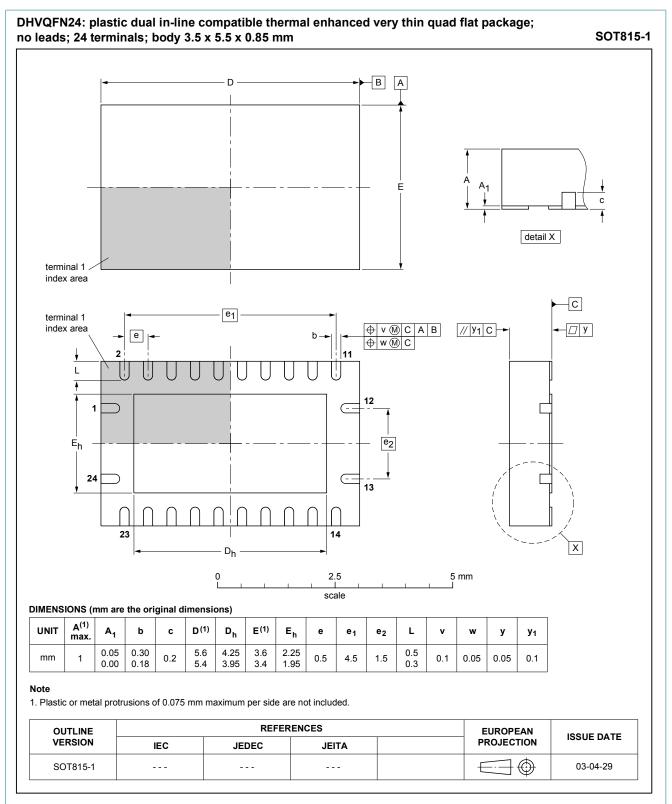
Package outline SOT815-1 (DHVQFN24)
